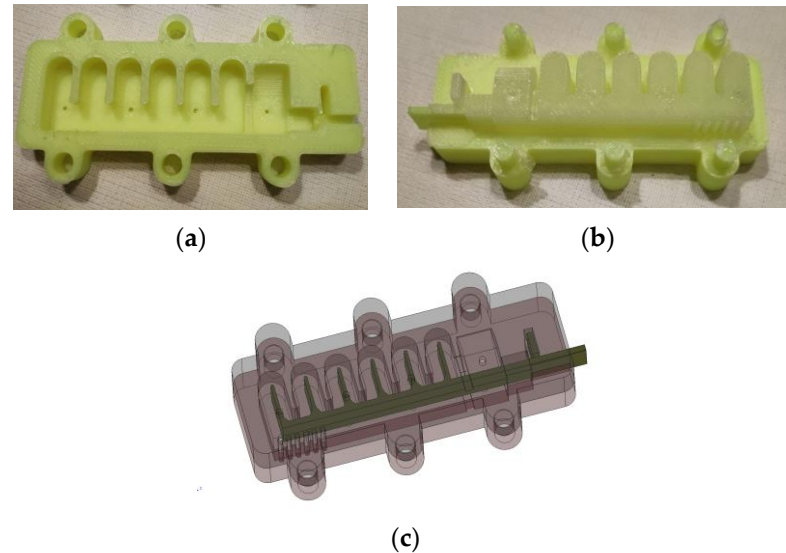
FDM-printed mold for PneuNet actuators of type 1: (a) half of the mold; (b) top half of the mold along with the PneuNet actuator molded with DragonSkin Fast 10 and inner core; and (c) 3D model of the mold and inner core.
